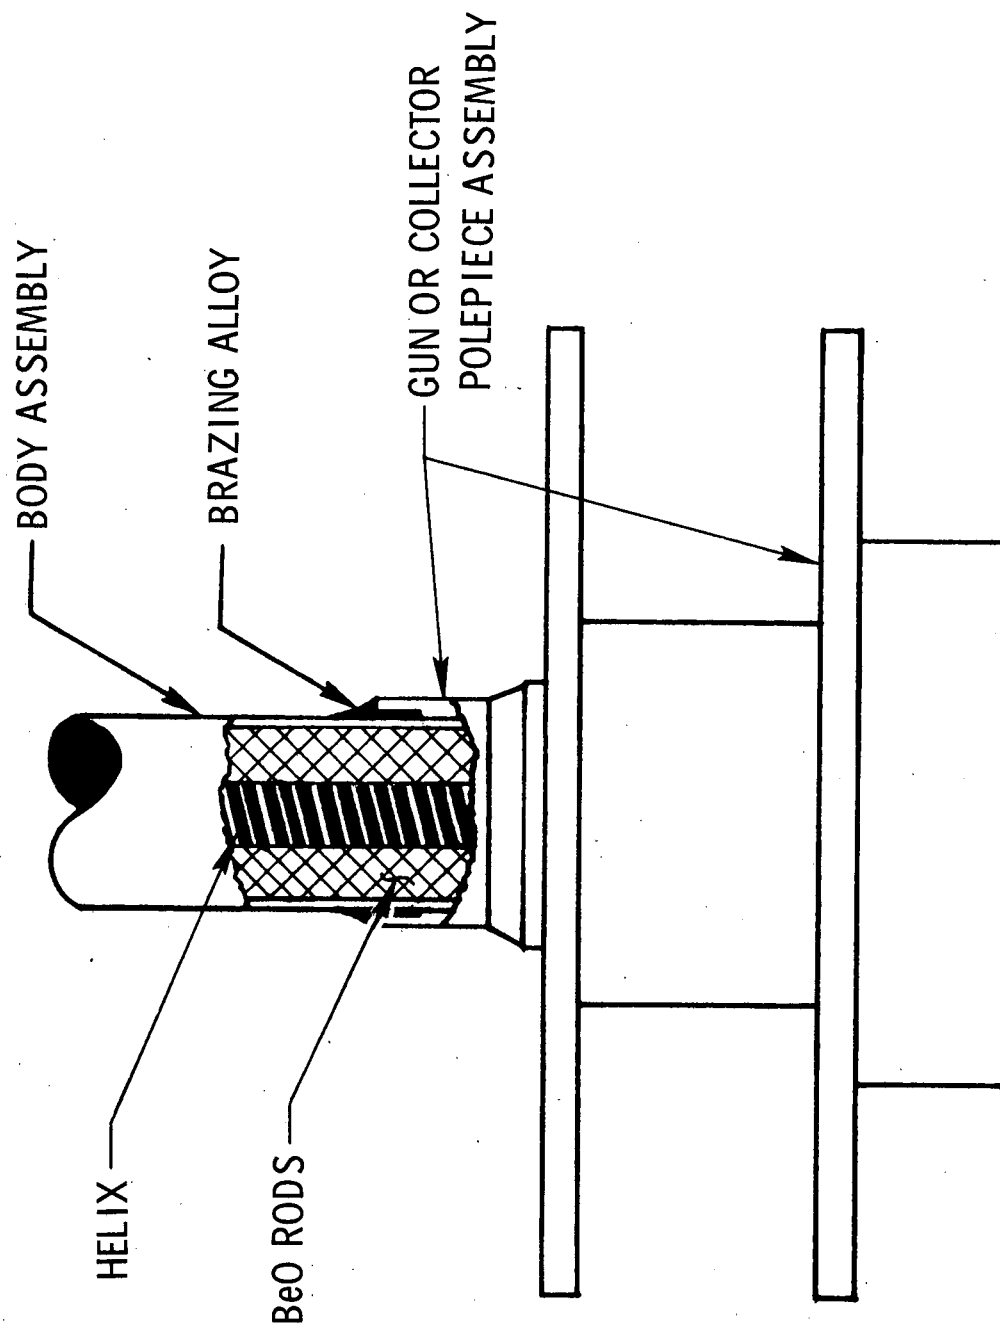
Cross-section of the braze joint between helix barrel and polepiece assembly.
